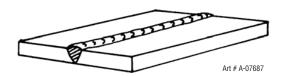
Flat Position, Down Hand Butt Weld
